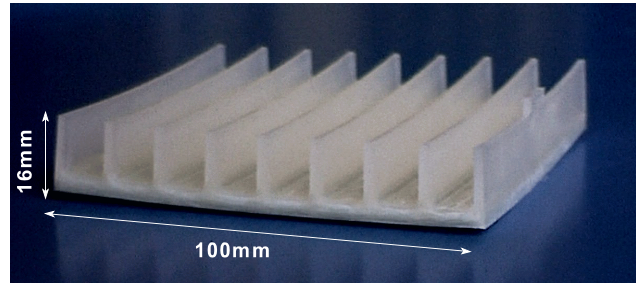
Stamped commingled glass/PP fabric overinjection moulded
